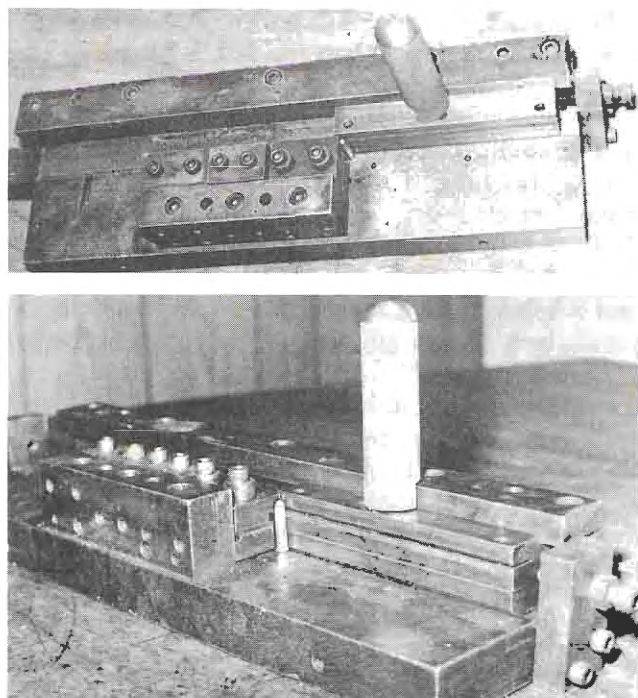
In-line Crimping Tool for Rimfire Cartridges
